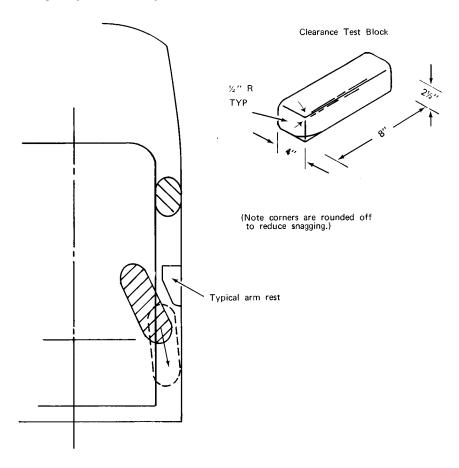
USE OF CLEARANCE TEST BLOCK TO DETERMINE HAND/ARM ACCESS
